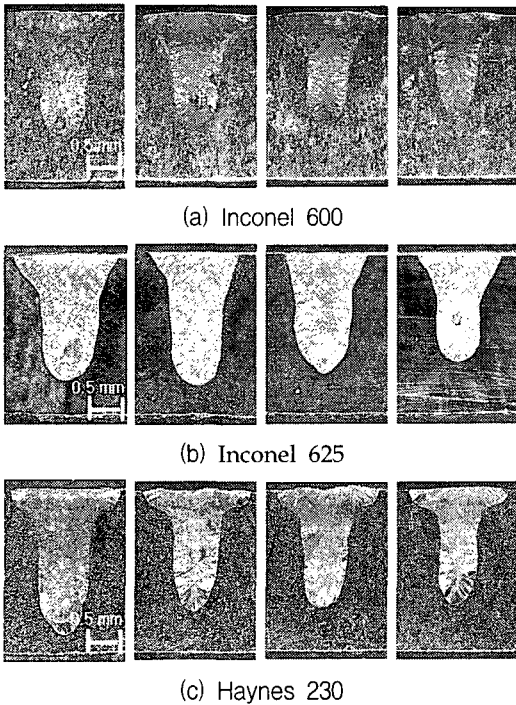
Cross section of laser welding bead as welding speed
